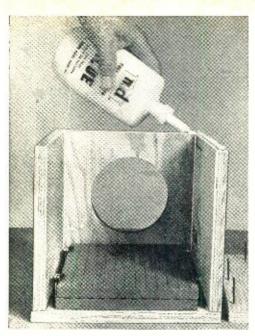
Top should be last wall mounted to speaker mounting board. Note, at far right, nails partially driven into top wall to facilitate assembly.
